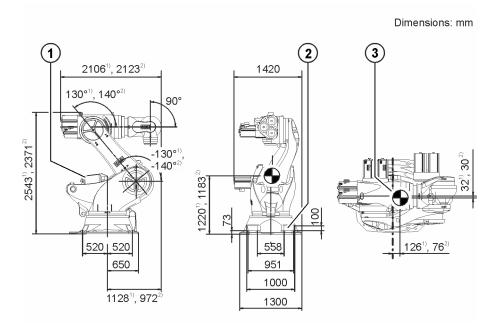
Transport dimensions with in-line wrist IW 1000
